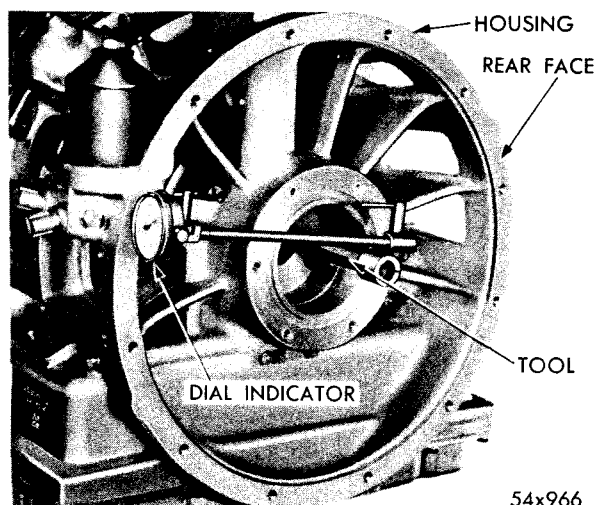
Checking Runout of Torque Converter Housing Rear Face with Tool C-870 and Dial Indicator Tool C-430
